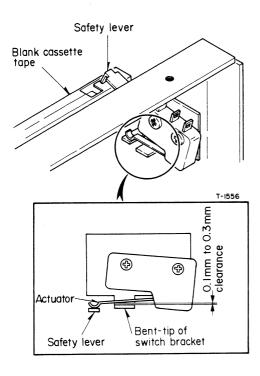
Micro Switch (A) Ass'y Clearance
